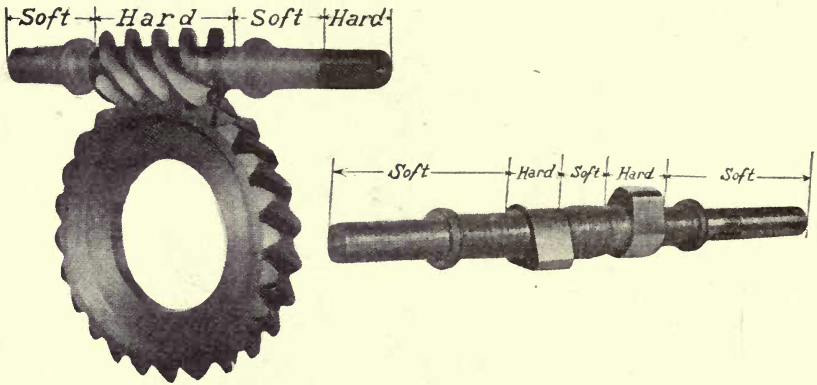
Automobile worm gear and cam shaft showing where hardness is required.
